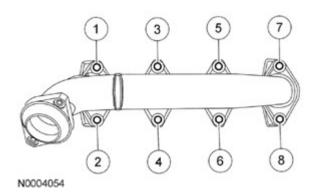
Identifying Tightening Sequence Of RH Exhaust Manifold Bolts Courtesy of FORD MOTOR CO.
